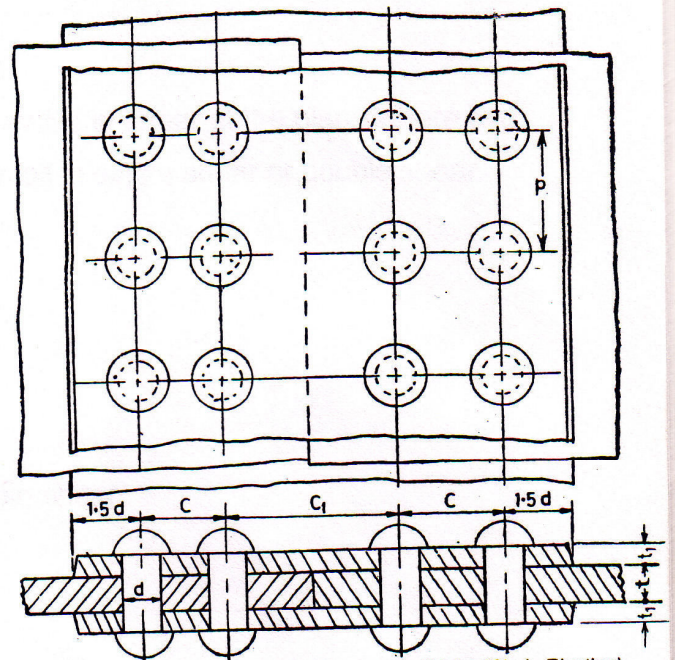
Double riveted double cover butt joint (Chain Riveting).
